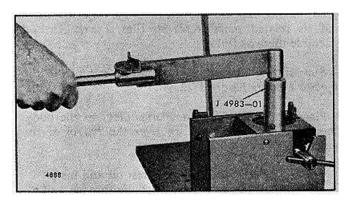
Tightening injector Nut with Torque Wrench using Tool J 4983-01
